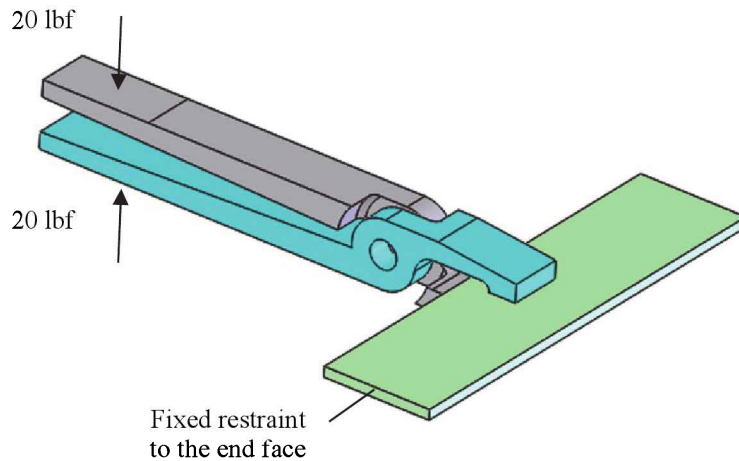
A plate being held by pliers is modeled in the PLIERS assembly.
